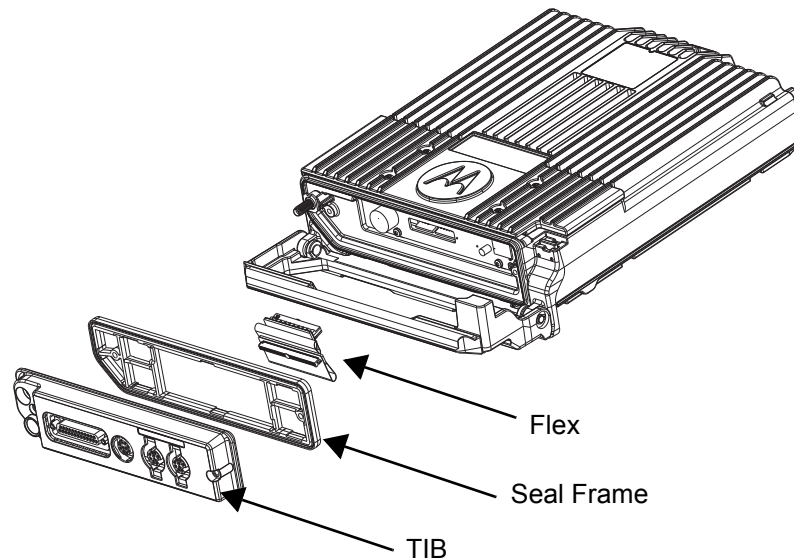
Removing the Flex (Transceiver Interface Board Connector)
